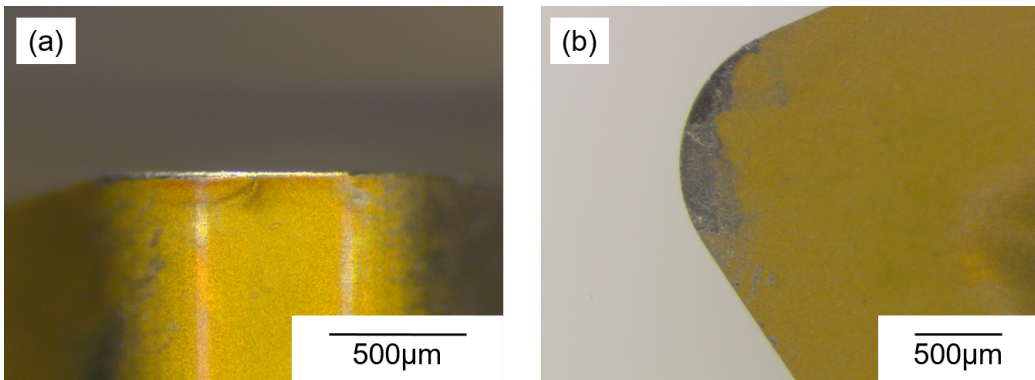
Example tool wear produced during face turning of face 2 on billet 3_2. The tool shown was used during the 1st repeat of face 2. The tool shown is representative of all passes performed on face 2.
